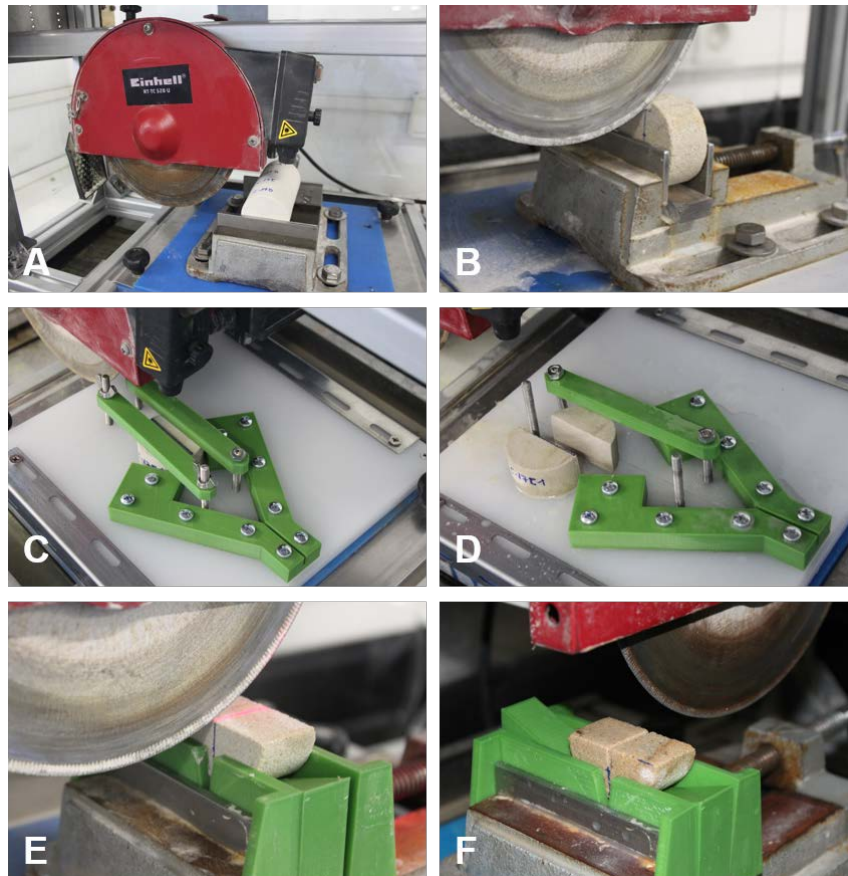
Preparation of samples for SCB and pCT testing. A) Plug slicing; B) U-shaped groove carving; C and D) Halving SCB specimens; E) Laser alignment for straight thin-notch cutting; F) SCB sample finished after a single pass of the diamond saw.
